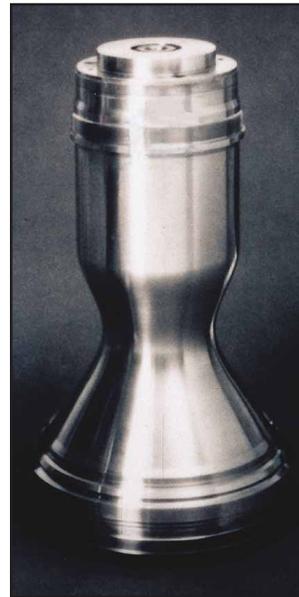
A machined electroformed thrust chamber for the Ariane launcher.
